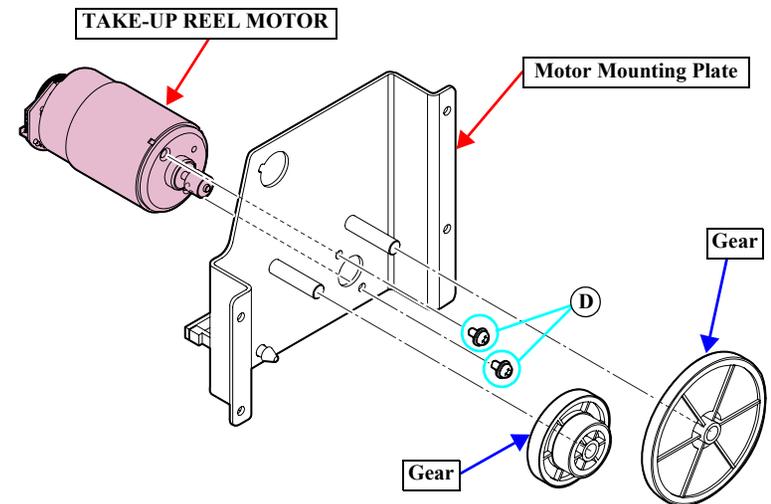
Removing the TAKE-UP REEL MOTOR
